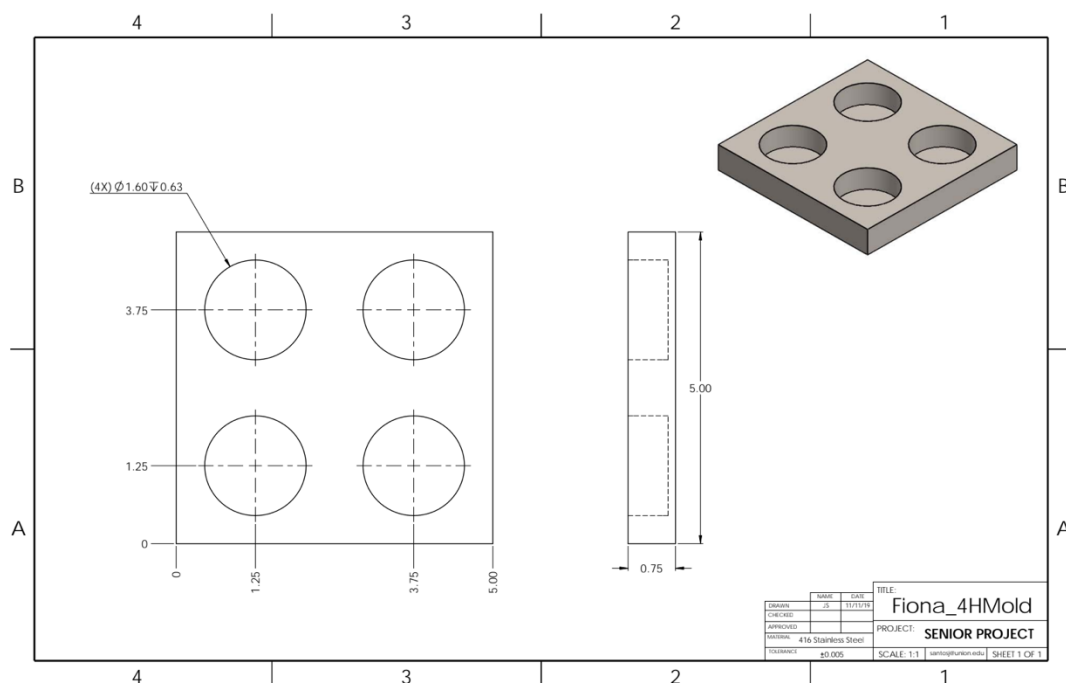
Stainless-steel Mold 2 design used for treatment of sol-gel samples in the hydraulic hot press, courtesy of Joana Santos (Mechanical Engineering Department, Union College).
